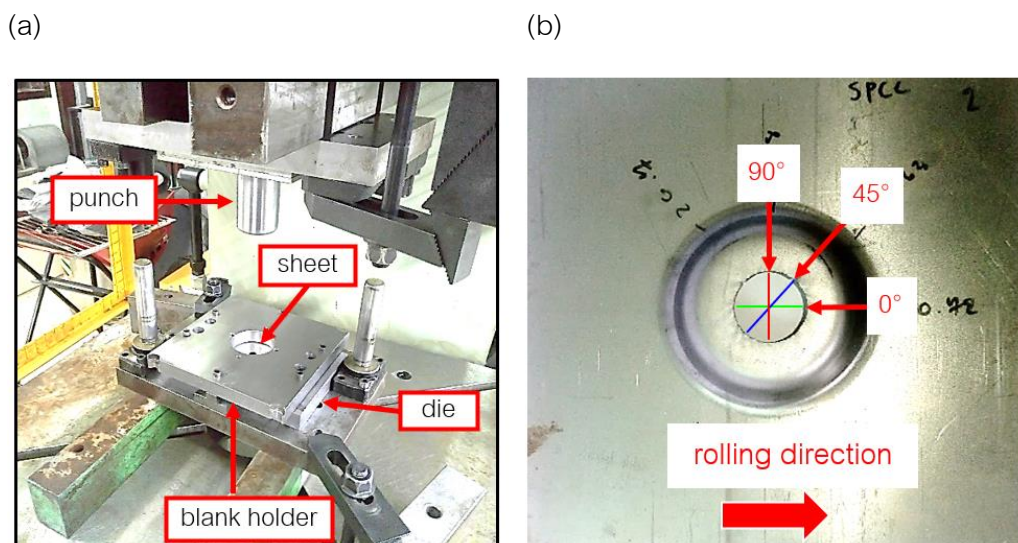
(a) experimental setup of hole expansion test, and (b) measurement crack position after the hole expansion test.
